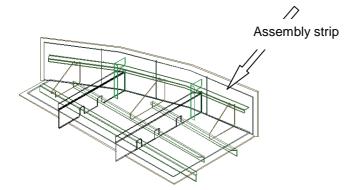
Prefabricated new section with welded assembly strip Slika 7 Predfabricirana zamjenska sekcija sa zavarenom montažnom trakom
